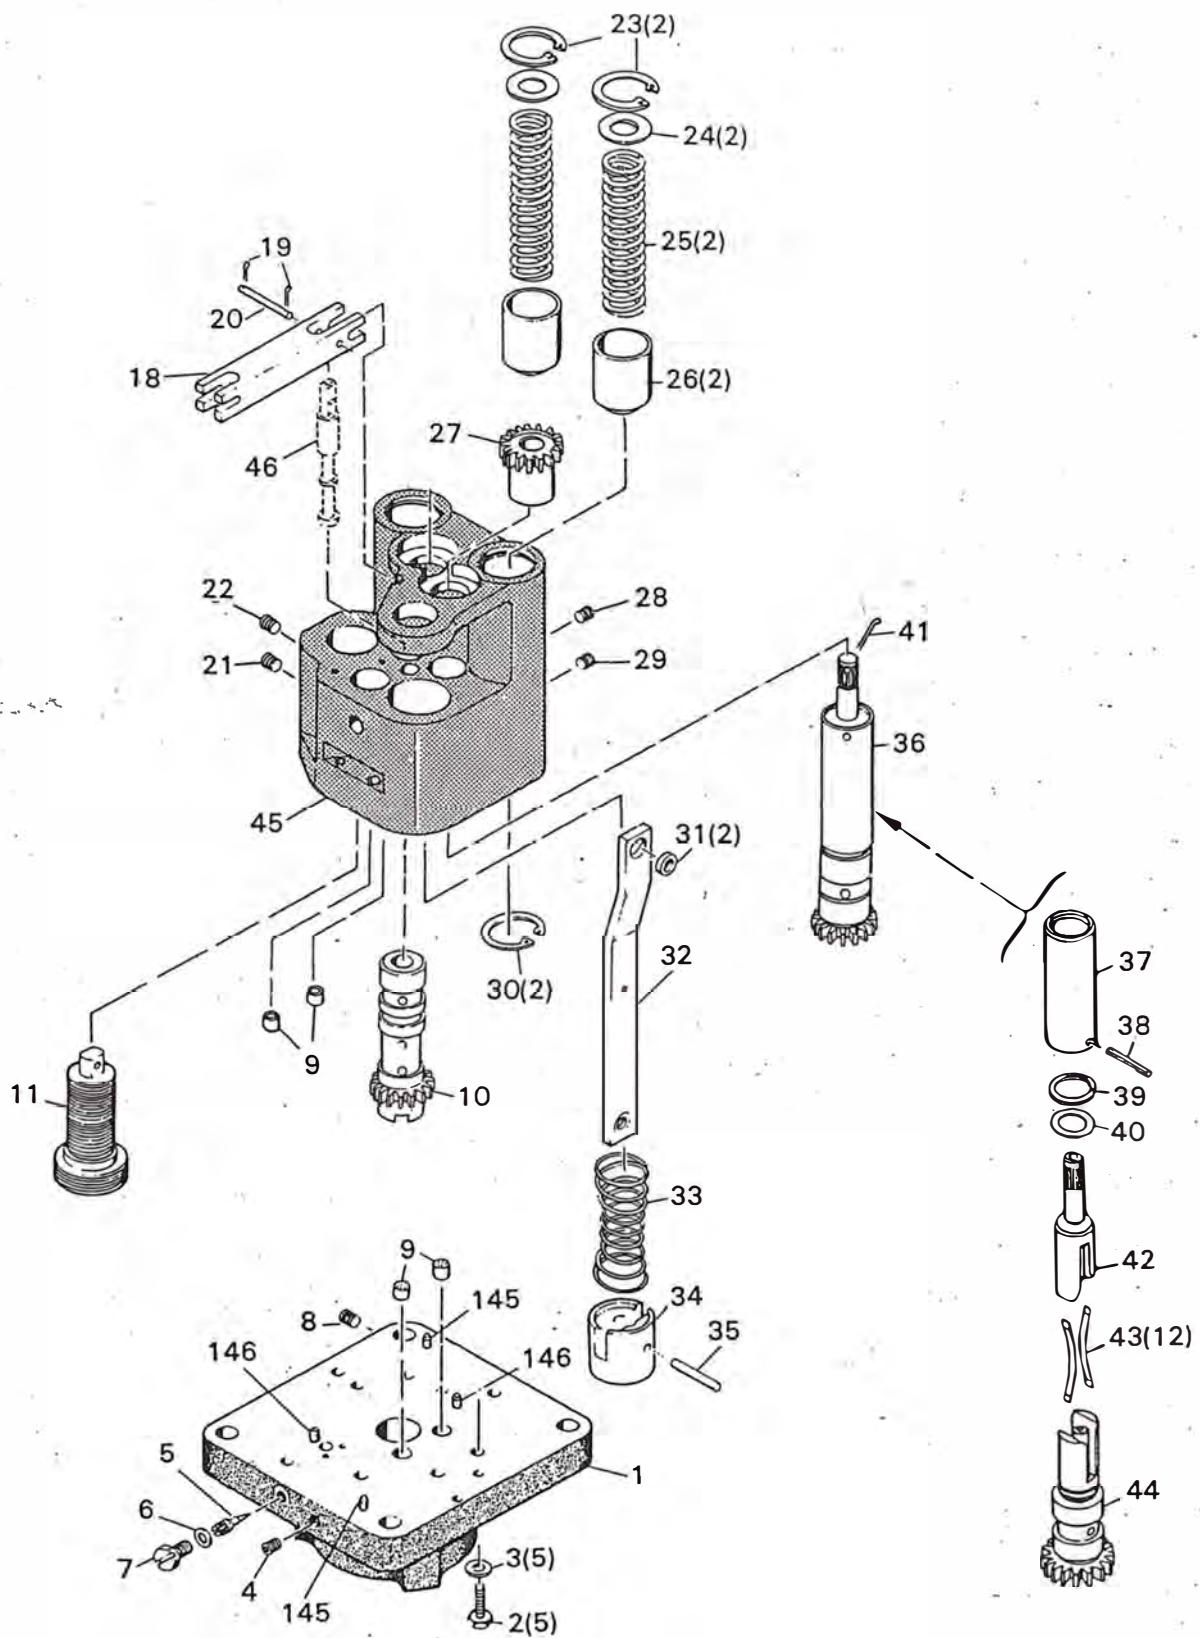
Exploded View of UG8 Dial Governor (Sheet 1 of 4)
